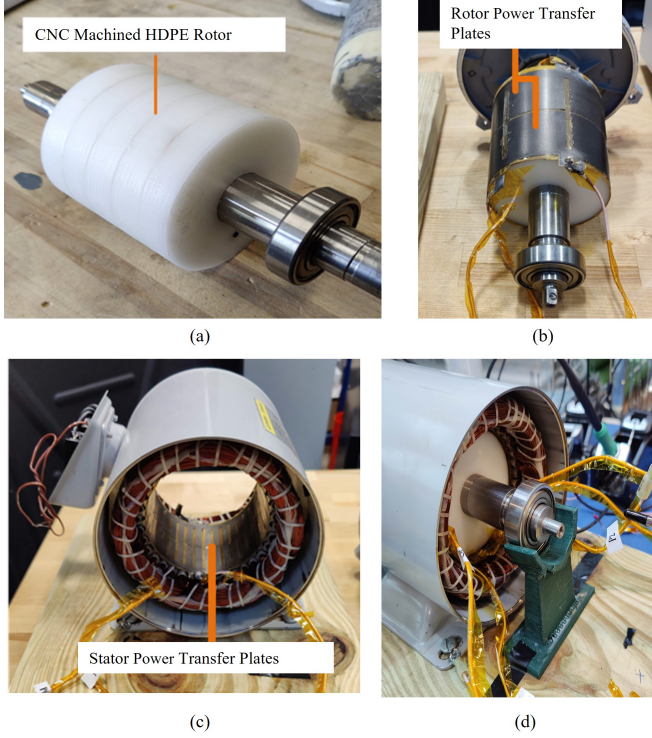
Prototype development (a) Development of the rotor replica. (b) Rotor plates mounted on the rotor. (c) Stator plates mounted on the stator. (d) Complete assembly of the prototype.
